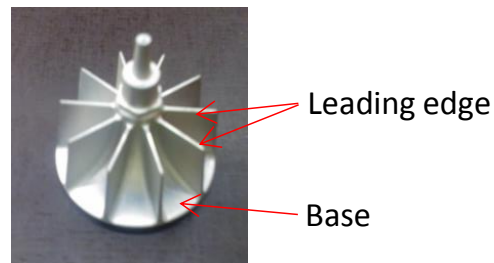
Standard test sample machined in an aluminium alloy 7075.
